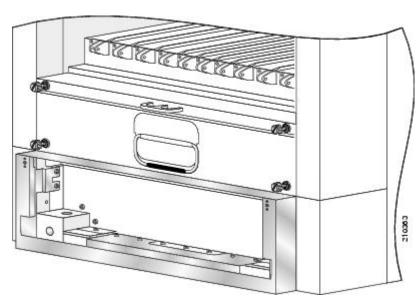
Removing the Set of Screws from the Lower Chassis Bay
